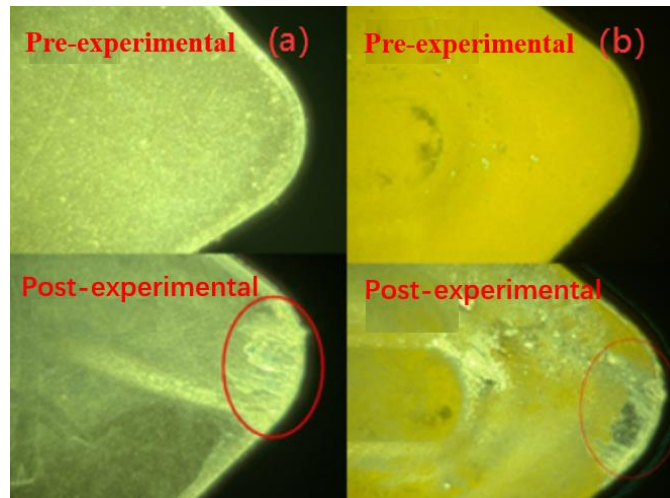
Morphology of the front face of CBN and carbide tools before and after the test
